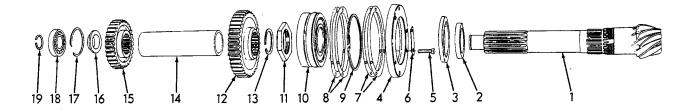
Bevel Pinion Shaft Parts (T-38141)
